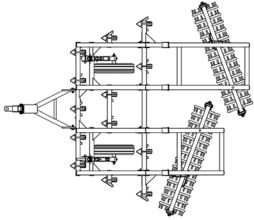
Layout diagram of a combined machine with a ring-bar roller
